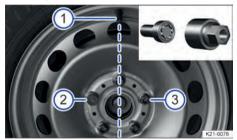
Changing a wheel: tyre valve ① and locations of the anti-theft wheel bolt ② or ③.
